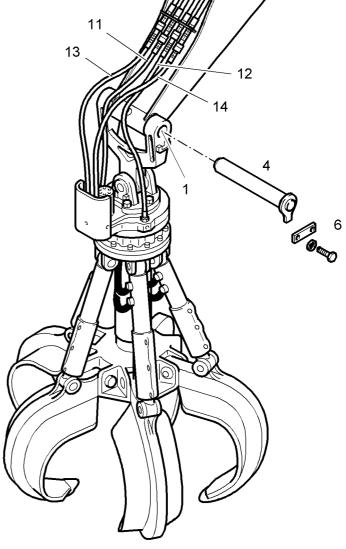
Attaching and dismounting the grab on the industrial stanchion
